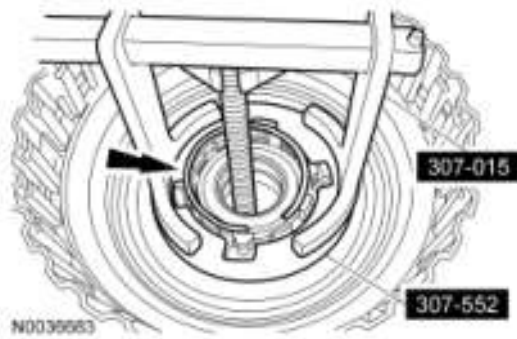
Installing Direct Clutch Return Spring Retainer Using Special Tools (307-015, 307-552)
